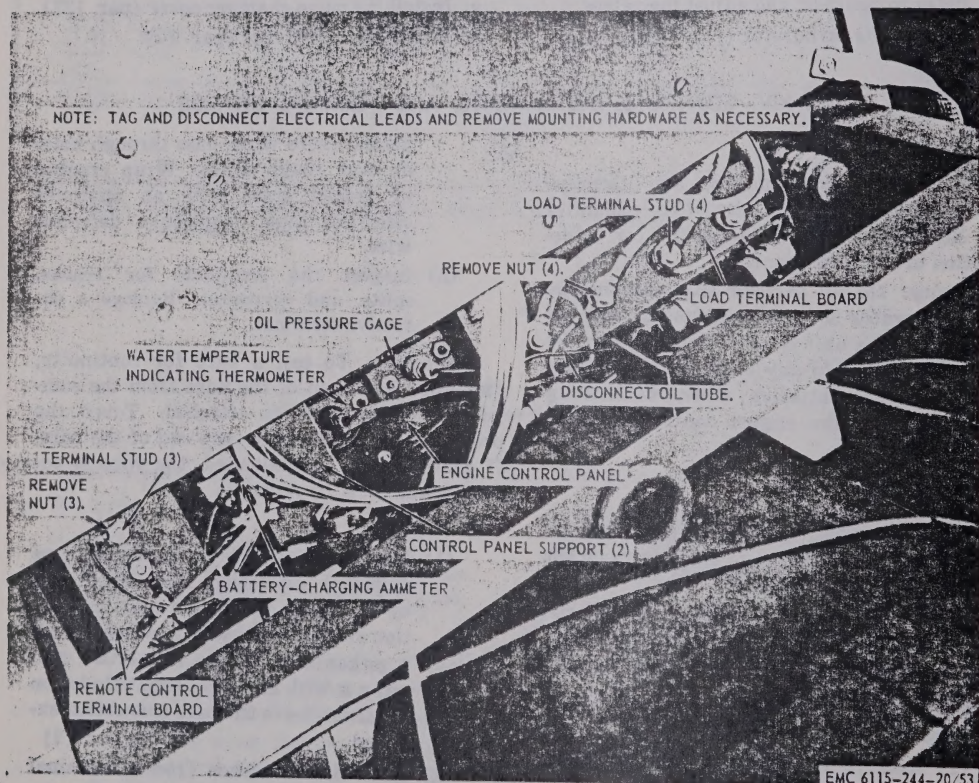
Oil pressure gage, water temperature indicating thermometer, battery-charging ammeter, load terminal board, remote control terminal board, terminal studs, and engine control panel, removal and installation.
